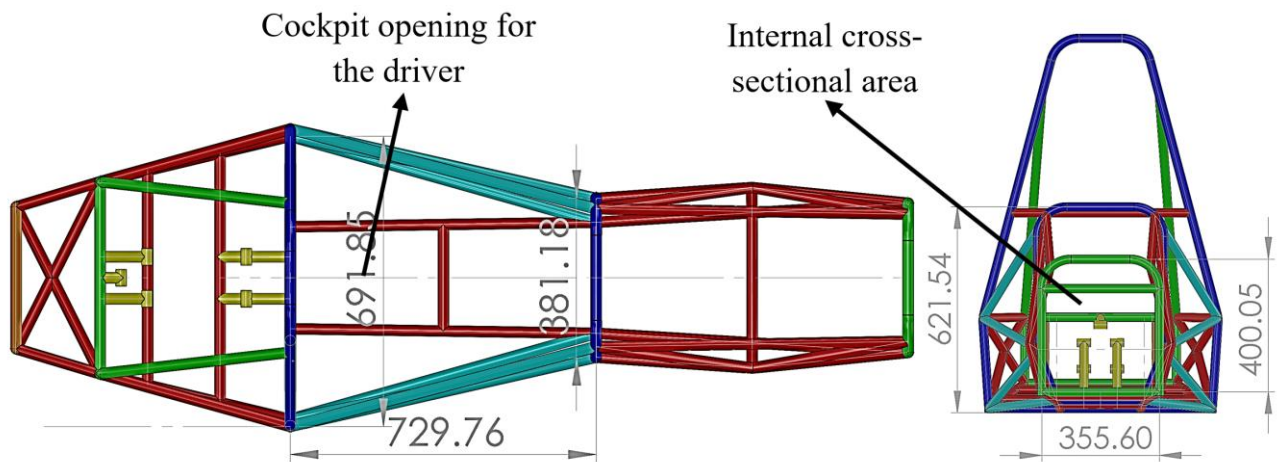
Cockpit opening from the top view and internal cross-section from the side view of Formula SAE M2 Chassis
